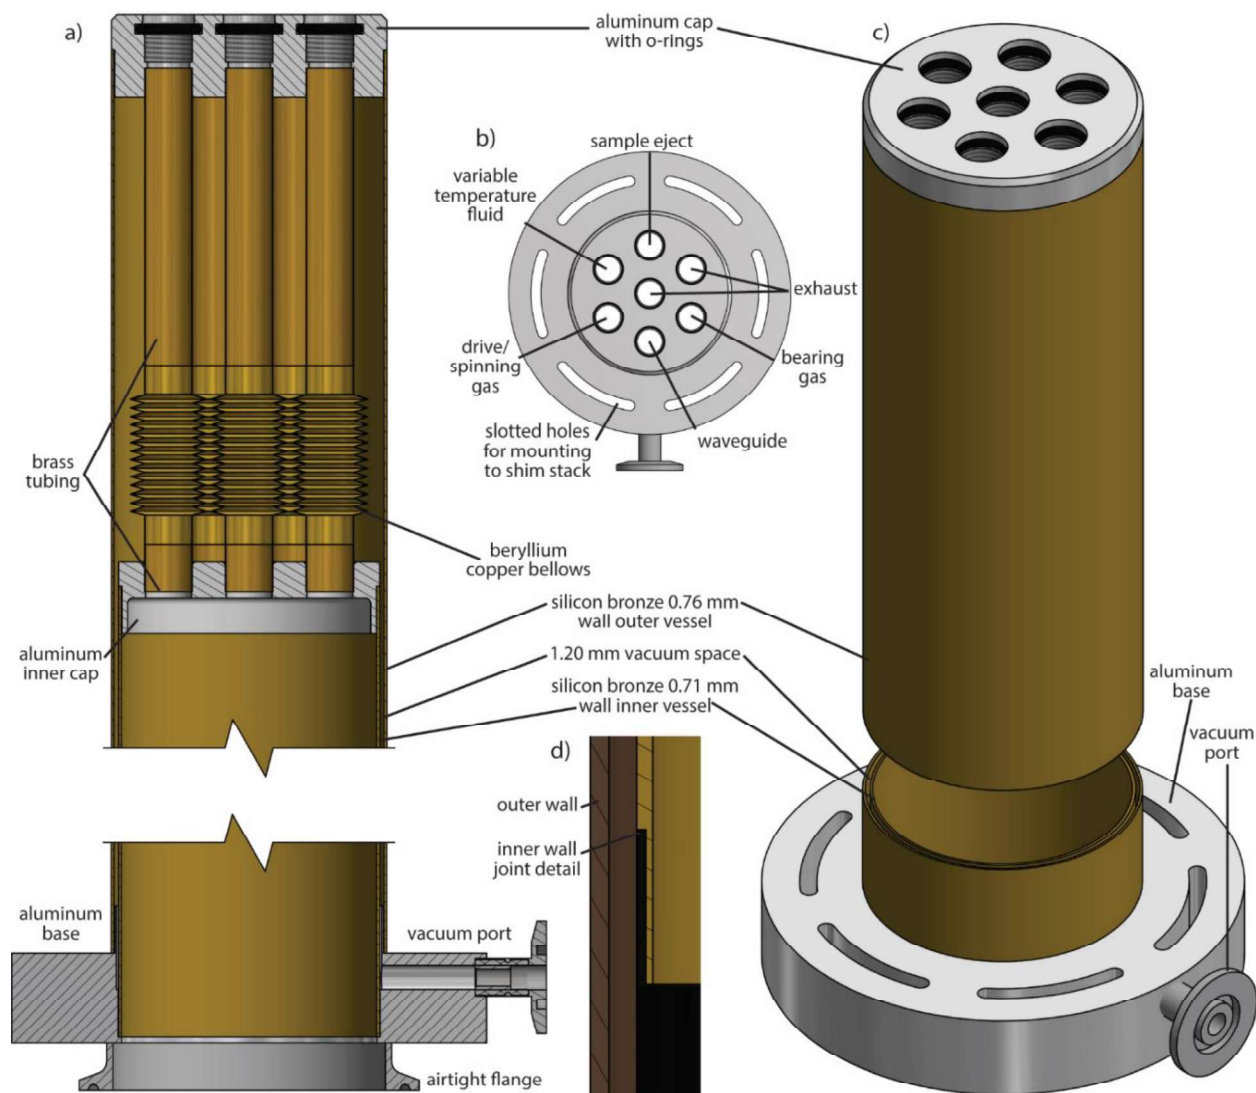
a)* CAD section view of cryostat. *b)* Top view CAD of cryostat indicating the location of transfer lines for the probe containing the 3.2 mm rotor. *c)* Isometric CAD of cryostat. *d)* Wall detail to show interlocking cryostat wall joints. All seals were made with cryogenic-grade epoxy.
